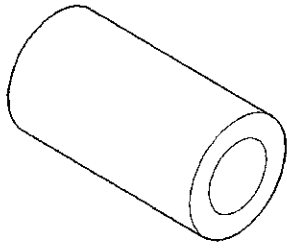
Silver Valve Guide Sleeve Tool C6818
